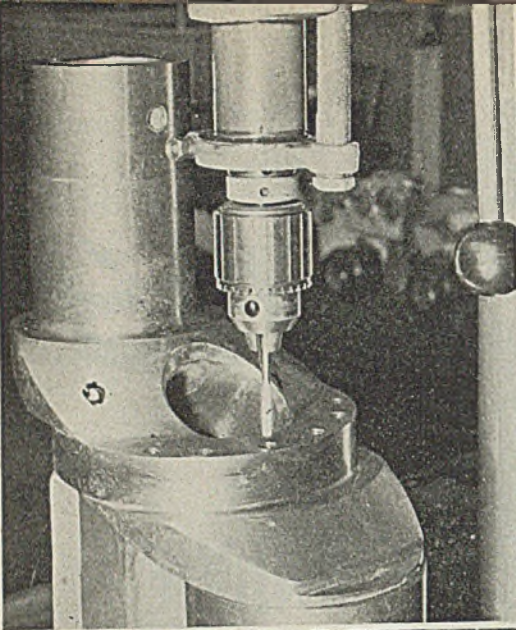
(Left)—Removal of broken tap from blind hole in Wright aircraft engine crankshaft is effected by alternate drilling and pencil wheel grinding by $\frac{1}{8}$ -inch steps until the tap stub collapses without damaging the threads. This setup is in a Walker-Turner drill press
